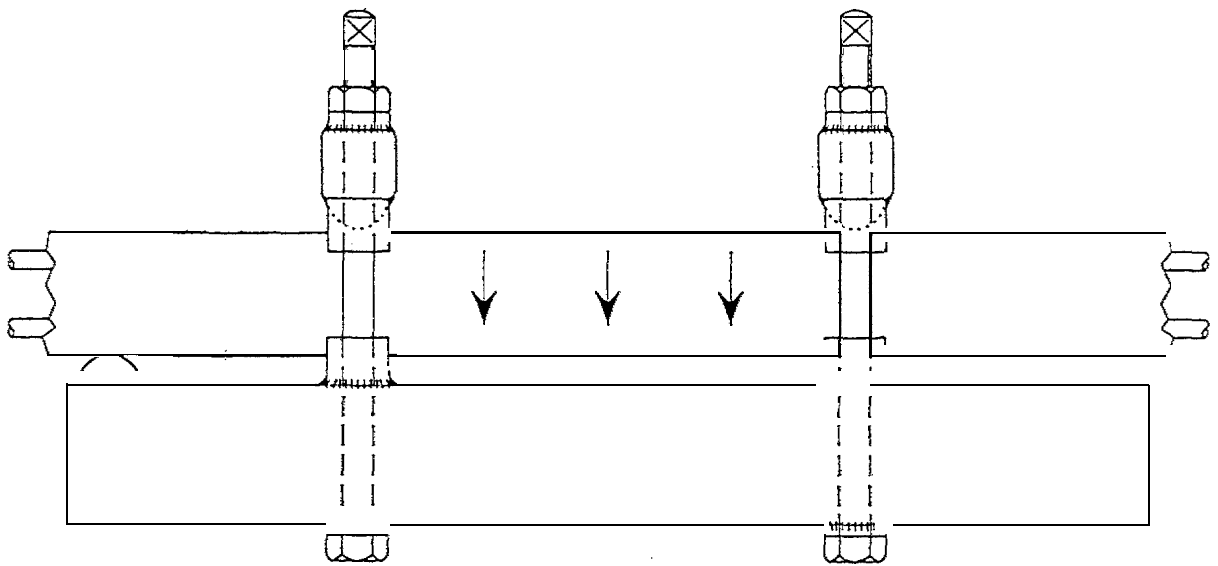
Mounting rig, where specimens are loaded to a constant center deflection before being exposed to chlorides.
